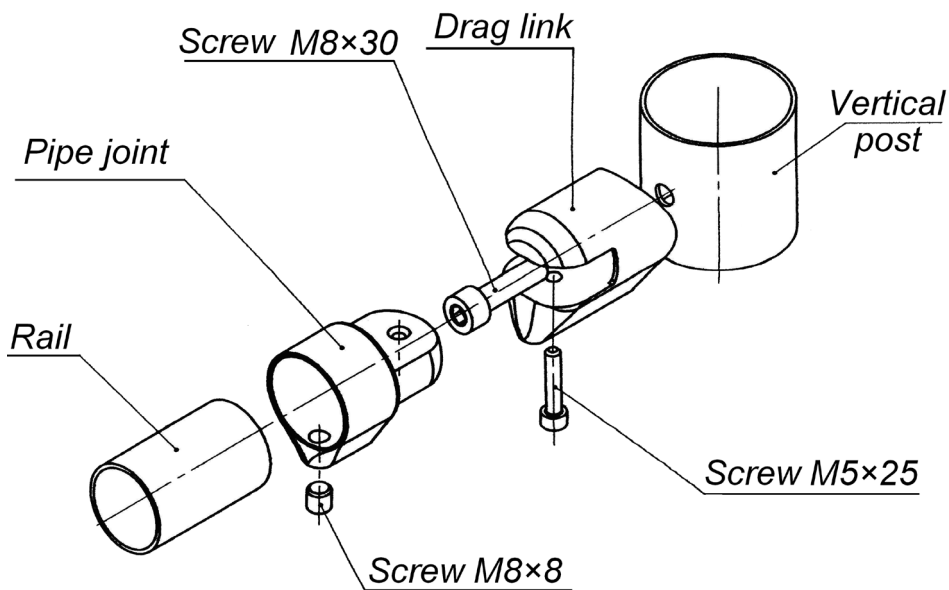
Fastening of rails to posts using BH02 0-11 adjustable coupling fittings
